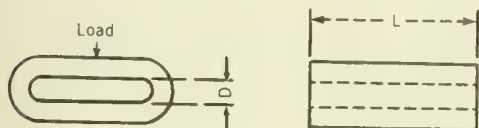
Deformed Specimen of Vacuum Brake Hose
